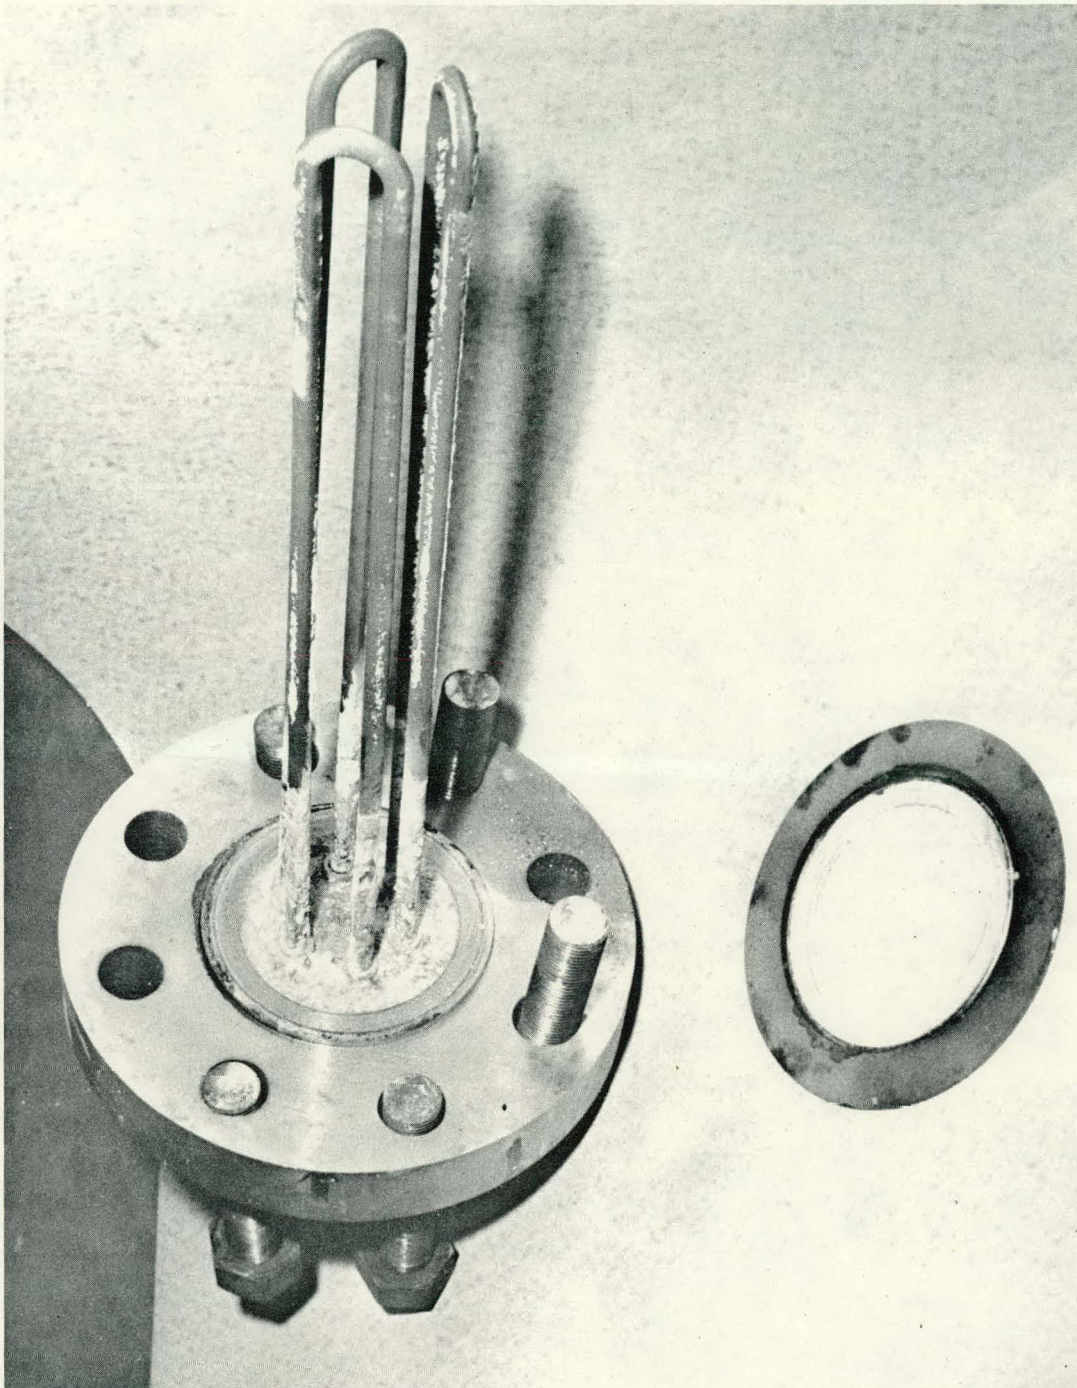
Pressurizer Base Flange and Immersion Heater Deposit
